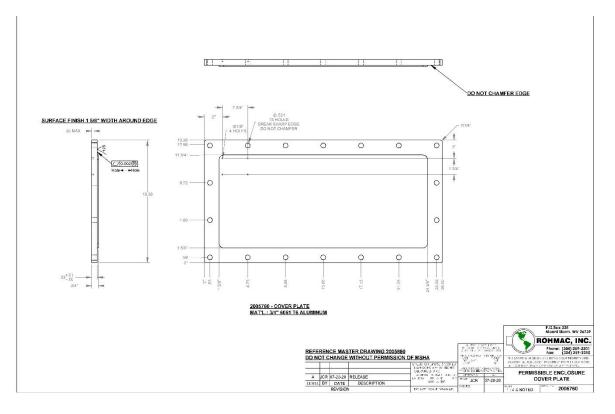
Revised XP Enclosure Cover Plate Drawing
